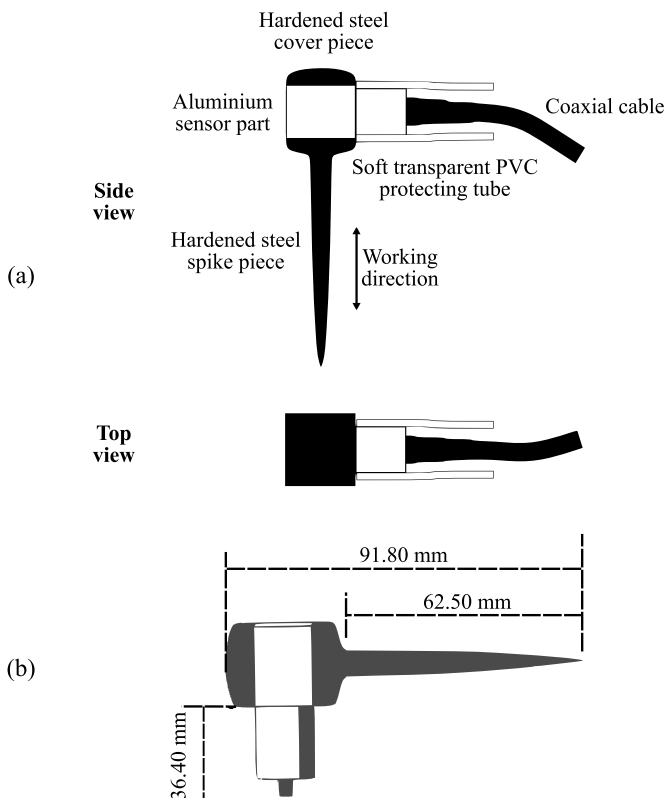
SD-02 piezoelectric sensor from Fakopp. (a) Side view and top view [36]; (b) Dimensions for the side view, all in mm.
